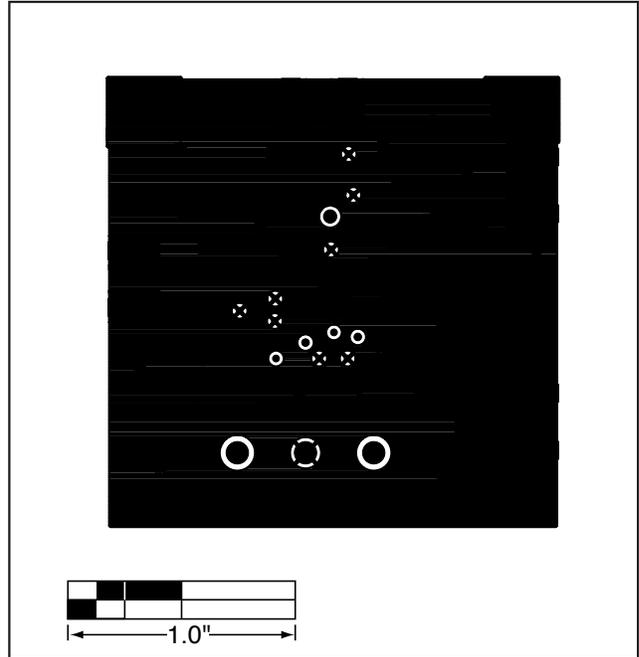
MAX9982 EV Kit PC Board Layout—Bottom Layer Metal
